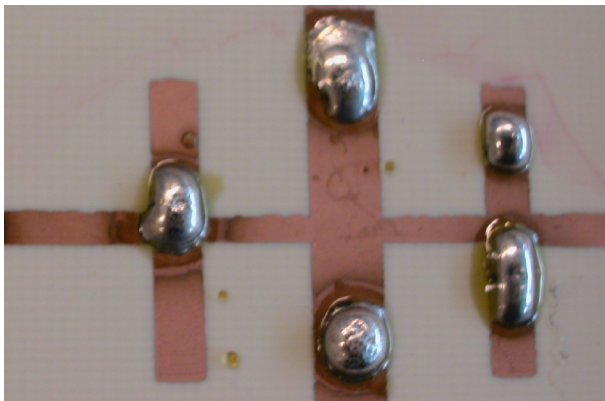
Soldering on inkjet printed-electroless plated tracks.
